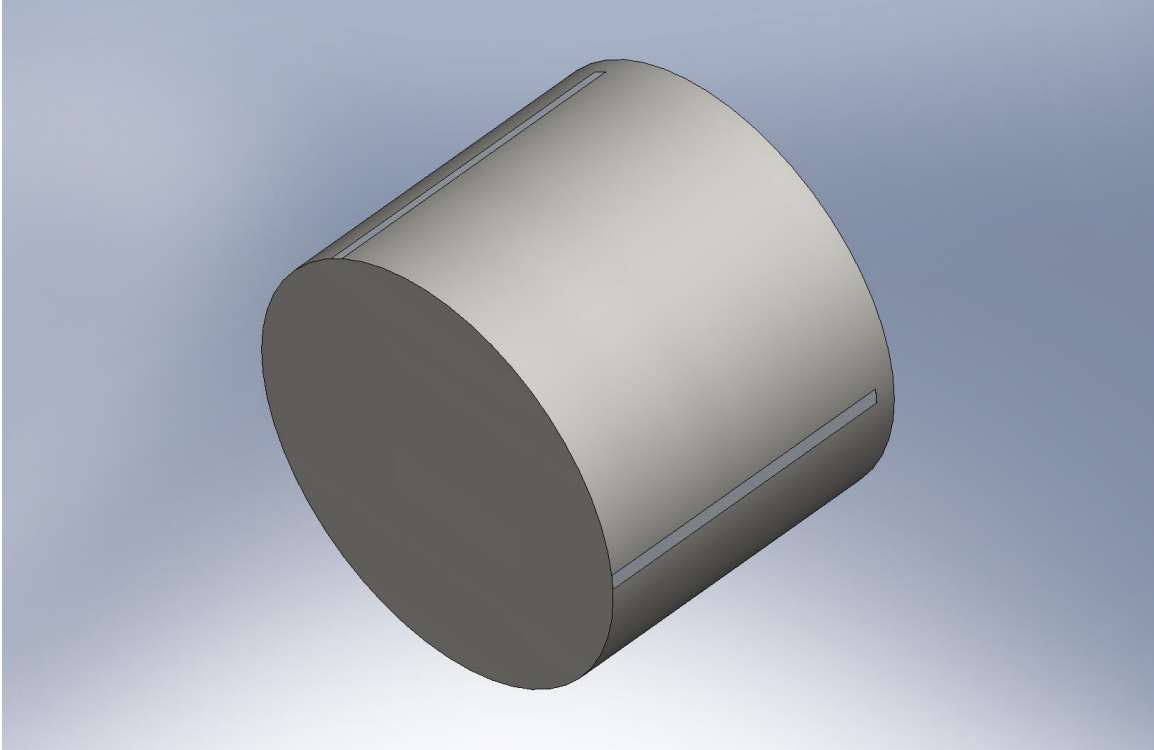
Rectangular flats cut into the cylindrical outer surface of the Support Tube's end.
